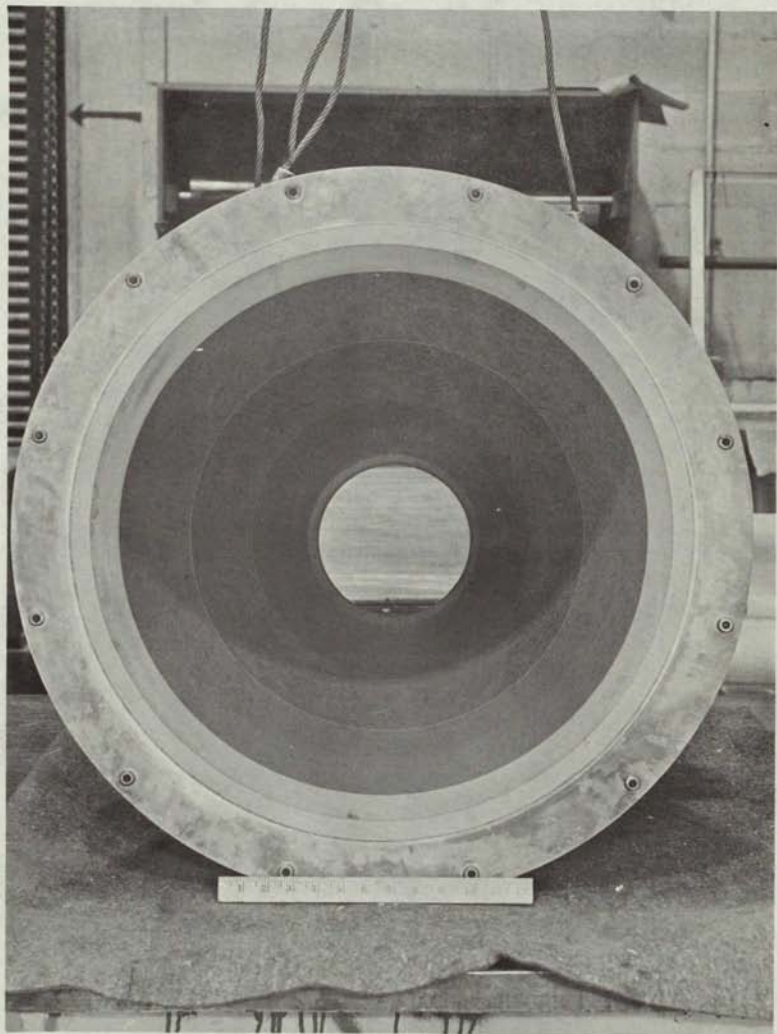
Nozzle No. 5 Tiered Exit Cone (View A)
